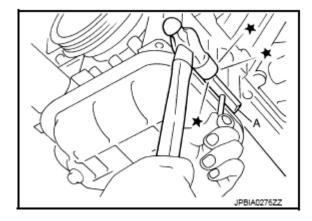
Inserting Seal Cutter Between Upper And Lower Oil Pan
